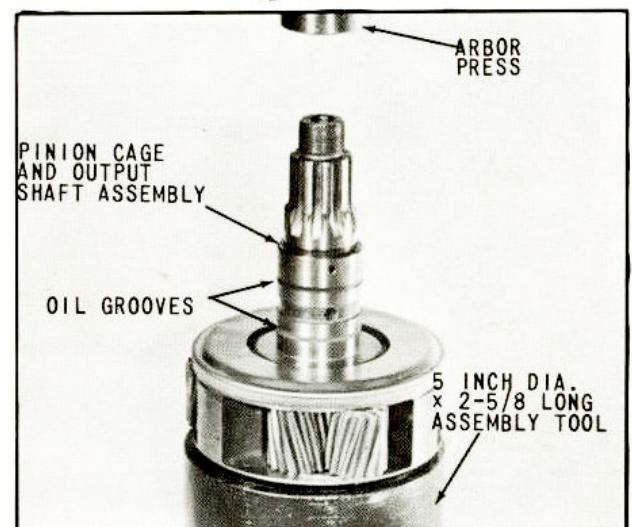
Pinion Cage and Output Shaft Assembly with Oil Grooves
